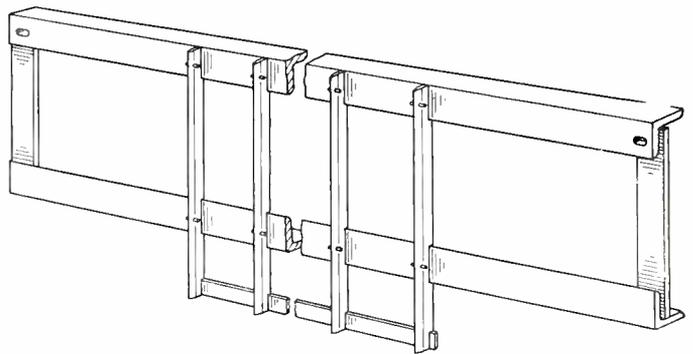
Basic steel work of former type shelf showing guide bars and horizontal cable support
